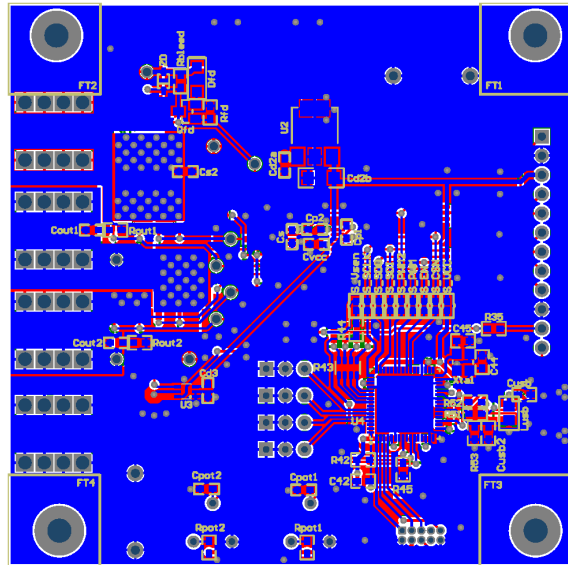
NCV7535 EVB PCB Bottom Composite Drawing
